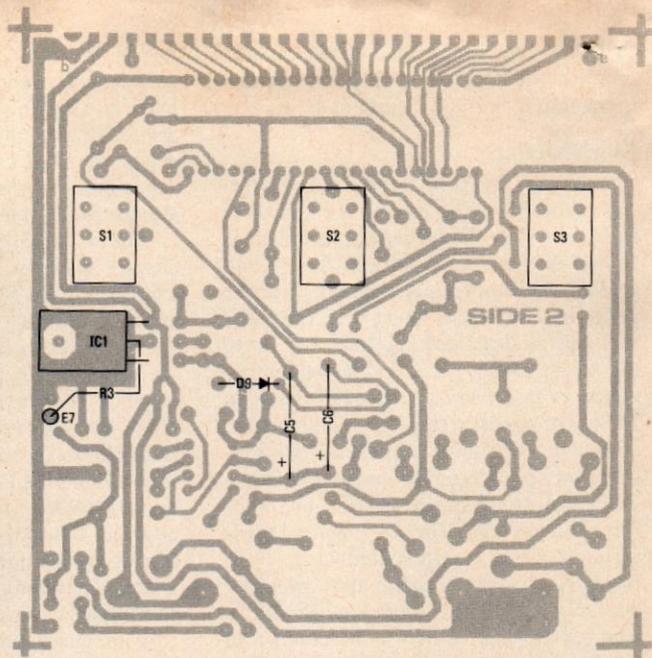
SLIDE SWITCHES and a few other parts are mounted on side-2 of the main PC board.
